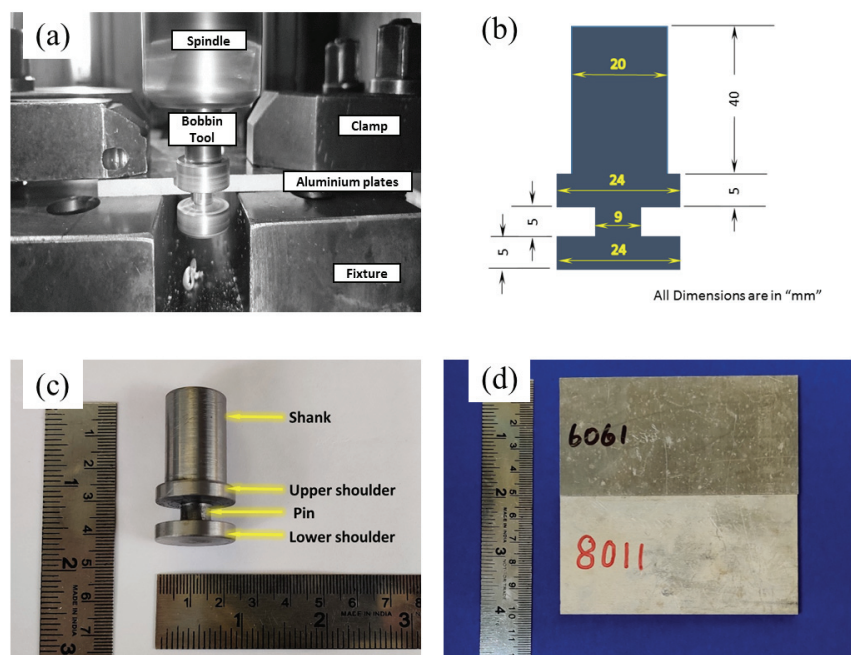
a) BOBTFSW process; b) nomenclature of BOBTFSW; c) Bobbin tool; d) materials used for welding.
